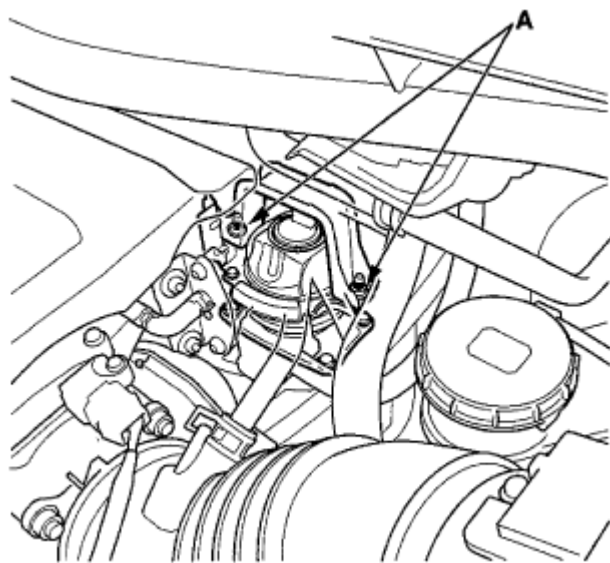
Identifying Rear Engine Mount Stop Nuts
